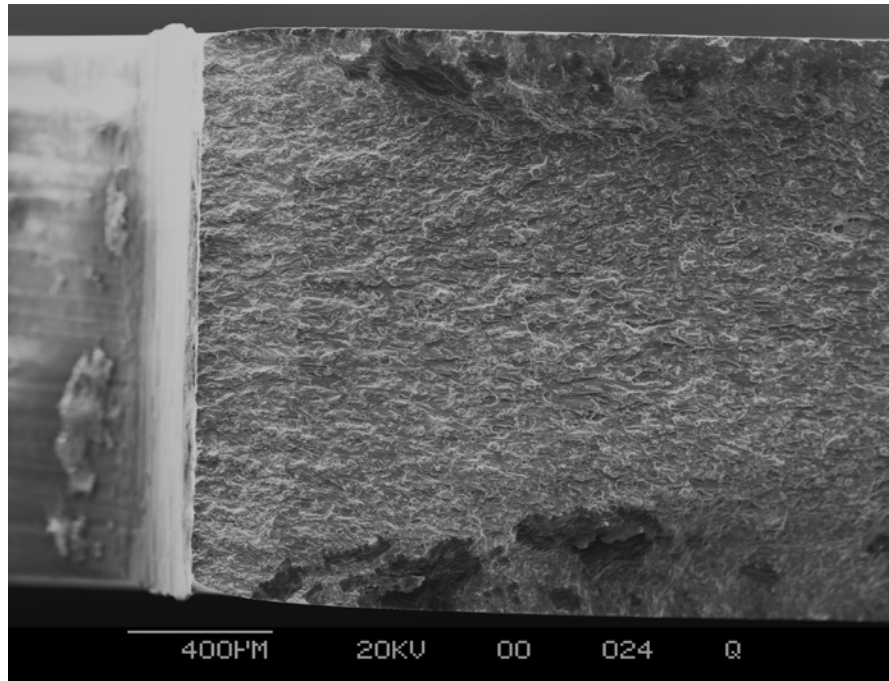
Fracture Surface of specimen 1S showing crack initiation area
